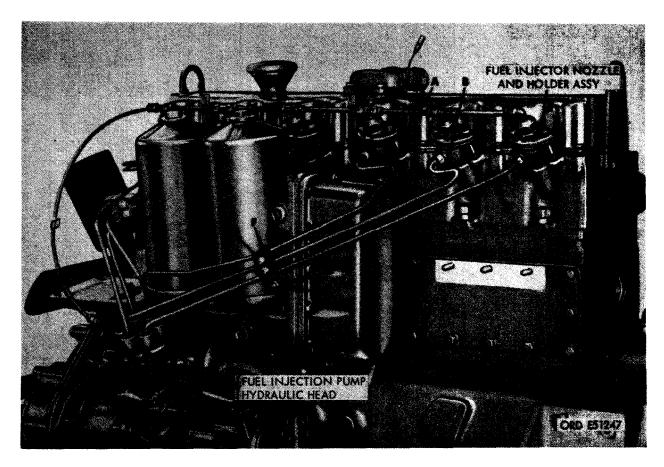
CONNECTING CYLINDER NO. 4, 5, AND 6 FUEL INJECTION TUBES (LATE MODEL ENGINE).
